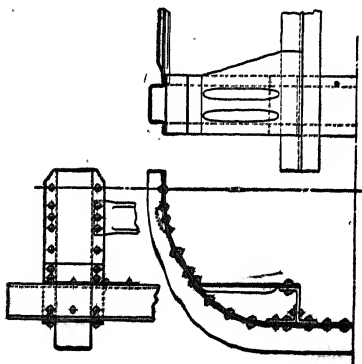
Car with frame consisting of two Z-bars and box-shaped arms.
